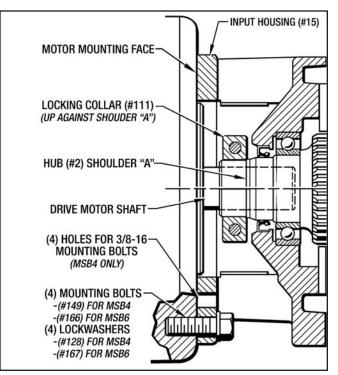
Installing MSB4 & MSB6 To Drive Motor
